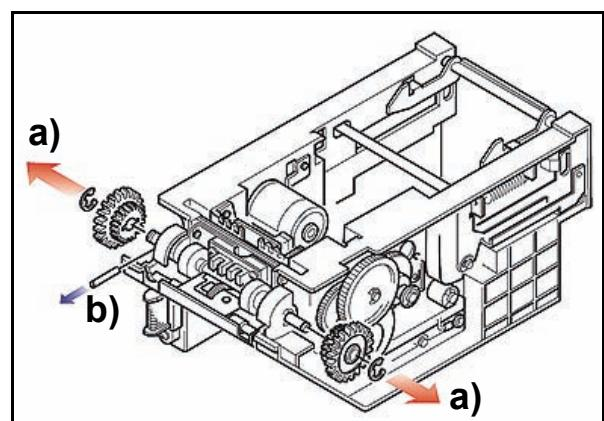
Transport Upper Timing Belt Drive Gear Removal
